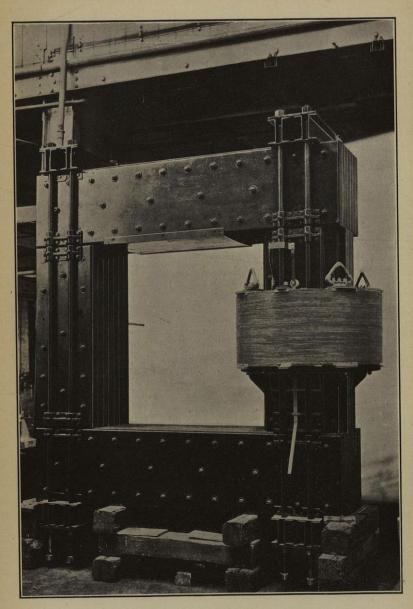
Details of Transformer Construction for a Kjellin Furnace.
